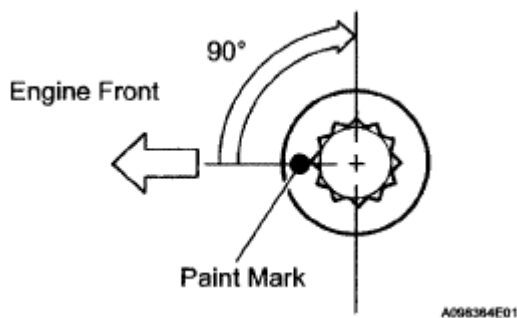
Identifying Cylinder Head Bolts Paint Mark
